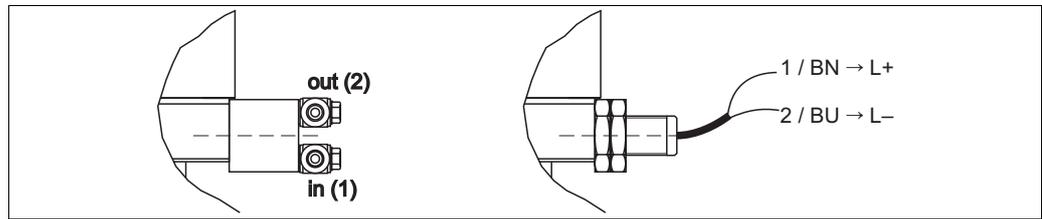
Limit position switches, left: pneumatic (1 = compressed air inlet, 2 = compressed air outlet)
